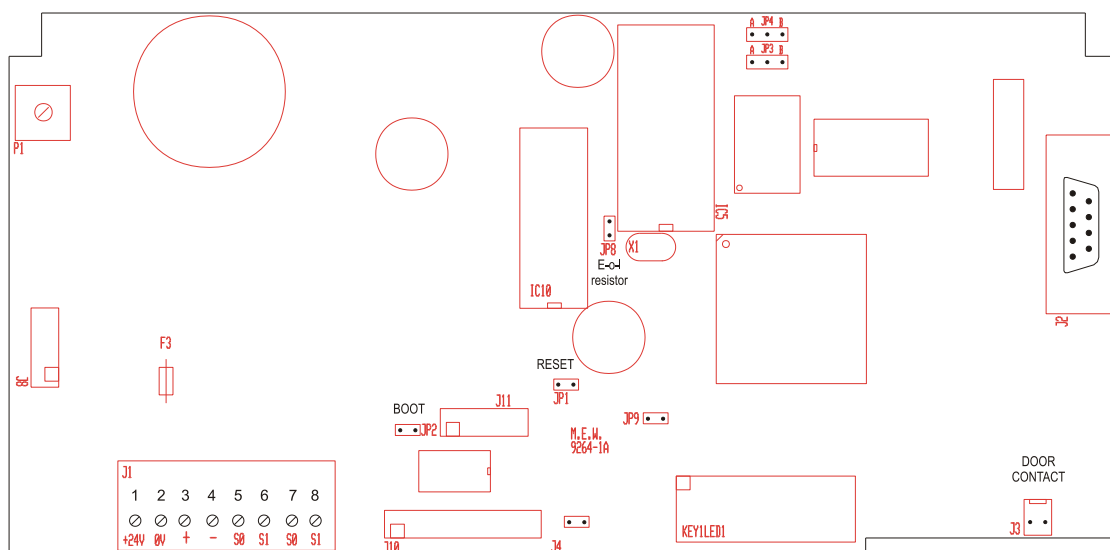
1736 PCB position of terminal block "J1", jumper "JP8"
